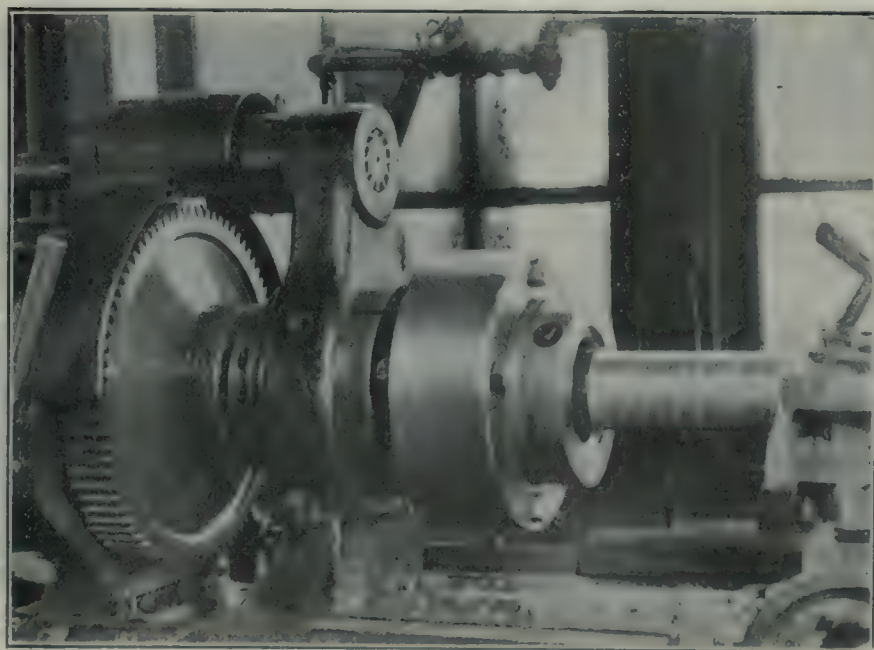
ROUGH TURNING ON A GISHOLT TURRET LATHE.
